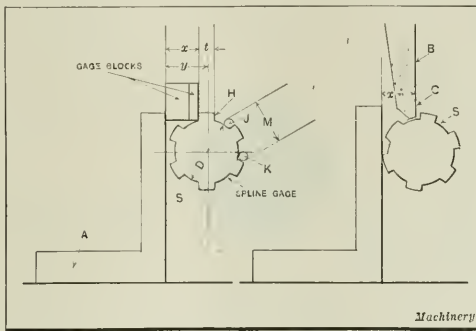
Method of locating Work and setting Wheel for grinding Spline Gages
